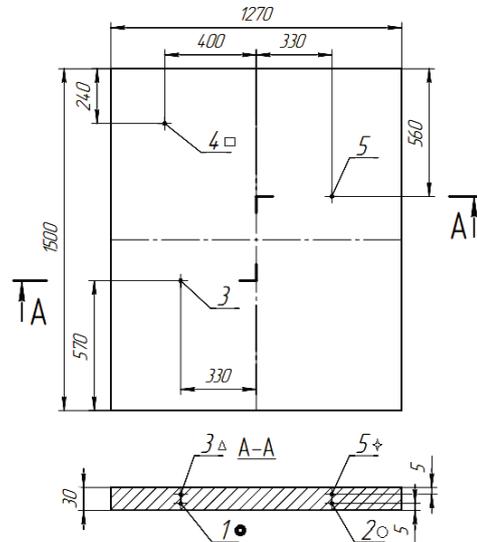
Schematic of location and conditional thermocouples on the control sheet workpiece
